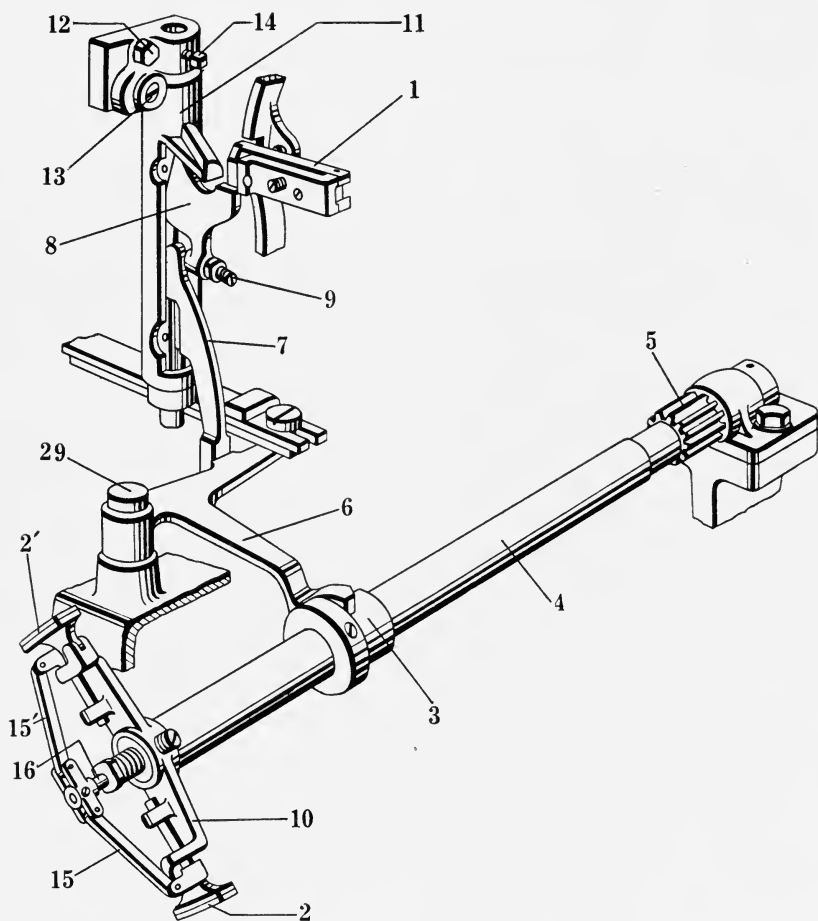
How the Clutch Goes Into Action. When the assembling elevator is raised by the operator, the delivery slide conveys the matrix line to the first elevator. Just as the delivery slide reaches its extreme left stroke, a roller on the cam roller arm fastened to the delivery slide lever shaft, strikes a plate on the automatic stopping pawl 1, and pushes the pawl from the upper stopping lever 8; this action releases the pressure from the forked lever 6 pivoted at 29, through the lower stopping lever 7. The pressure of the forked lever 6 being released from the flange 3, connected to the clutch rod 16 within the hollow driving shaft 4, permits the clutch rod spring to push the rod inwardly, and the links 15 and 15' expand both shoes faced with the leather buffers 2 and 2' against the inner rim of the revolving clutch pulley.
